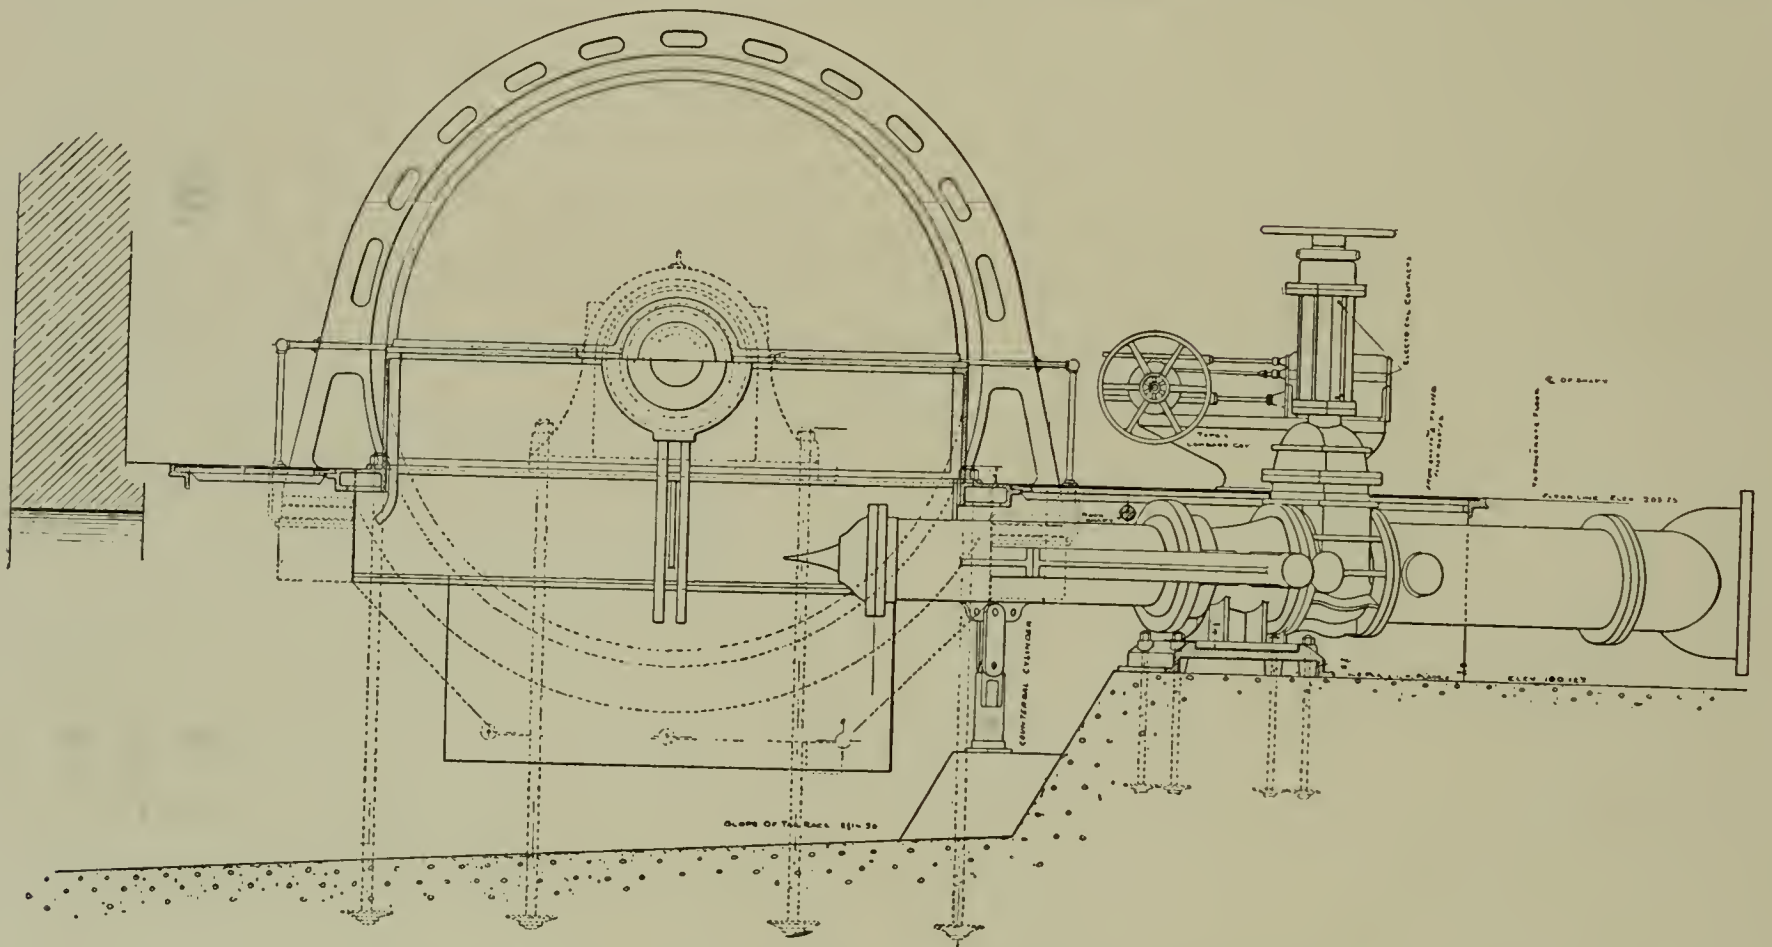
GENERAL VIEW OF THE ARRANGEMENT OF A PELTON WHEEL WITH A LARGE DEFLECTING NOZZLE, SHOWING THE COUNTERBALANCING CYLINDER USED FOR REDUCING THE POWER REQUIRED TO OPERATE THE NOZZLE
